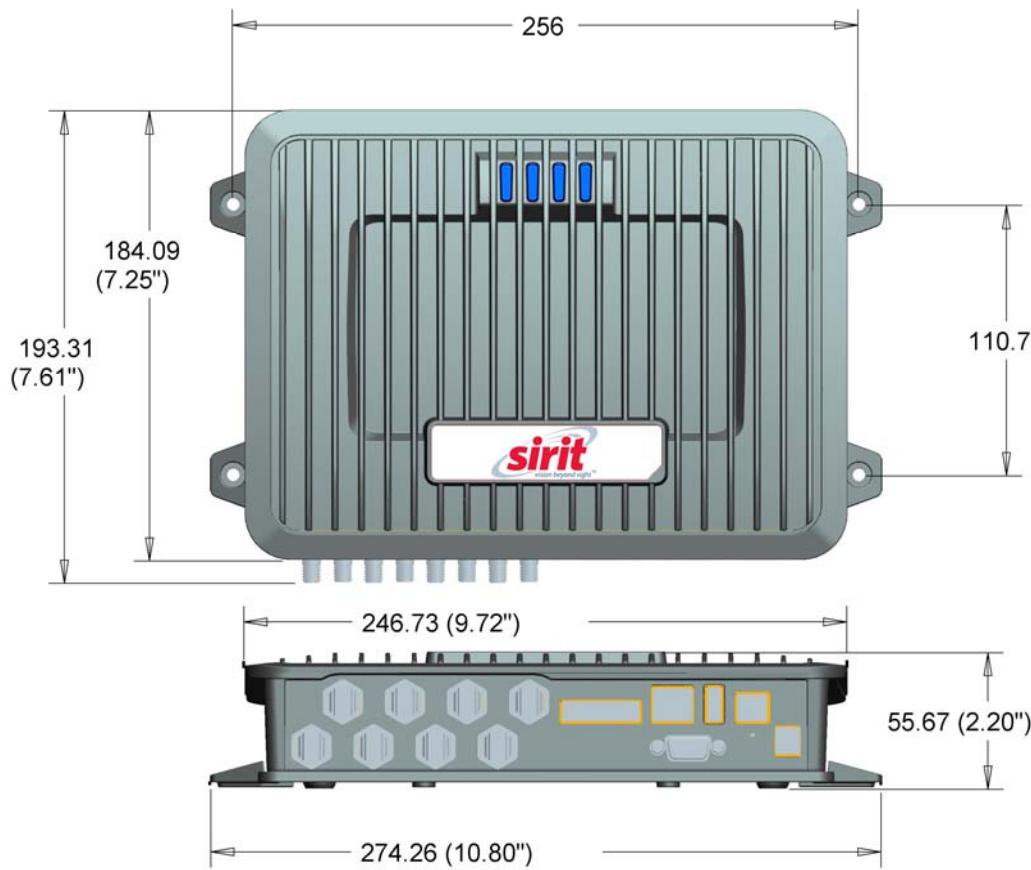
INfinity 610 Mechanical Dimensions (dimensions in mm)
